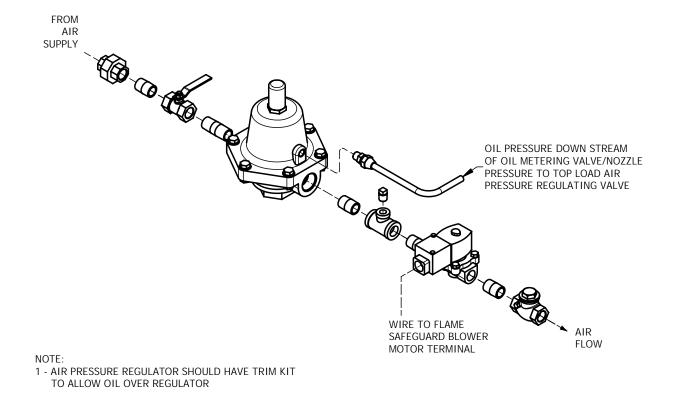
Plant Air System/Top Loaded with Oil
